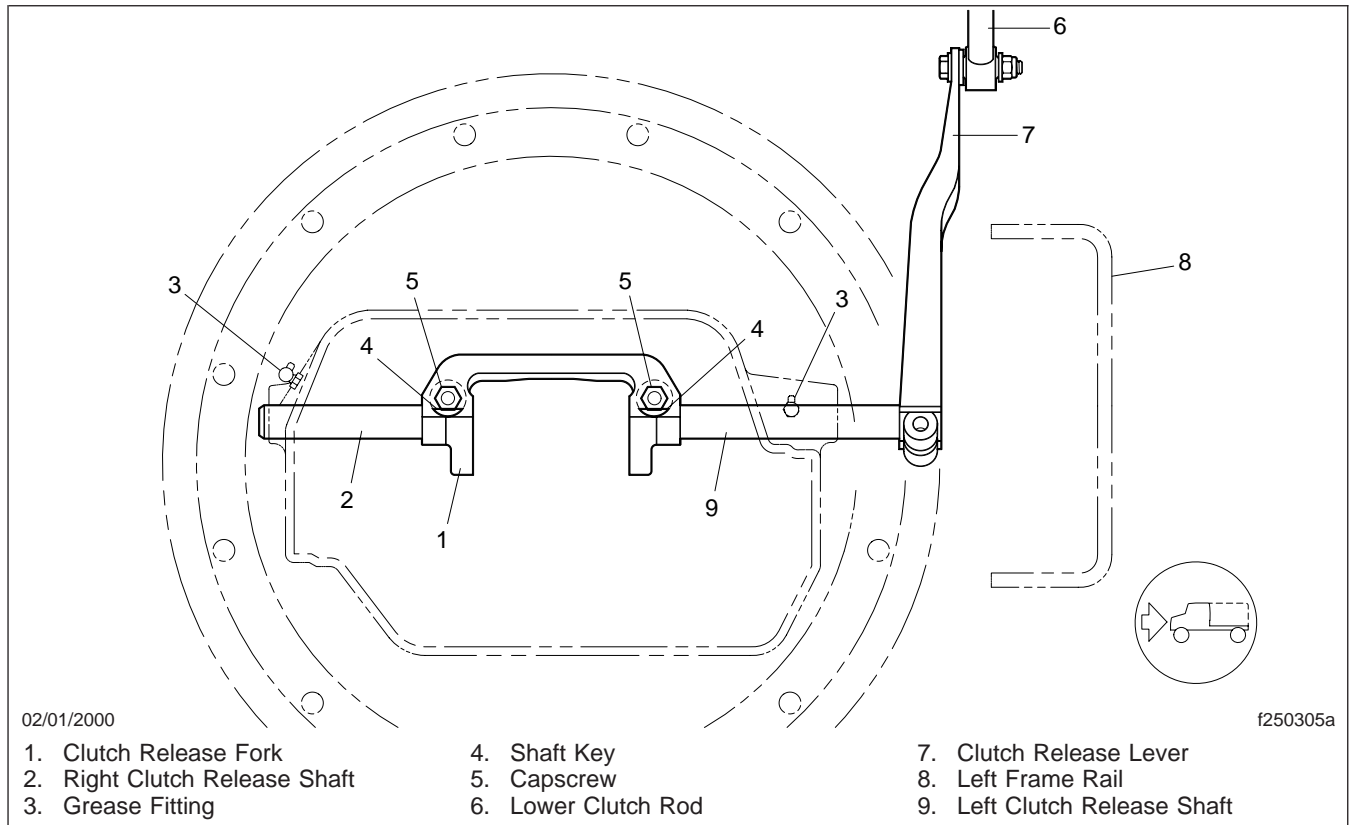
, Clutch Release Shaft (pull-type clutch shown)
